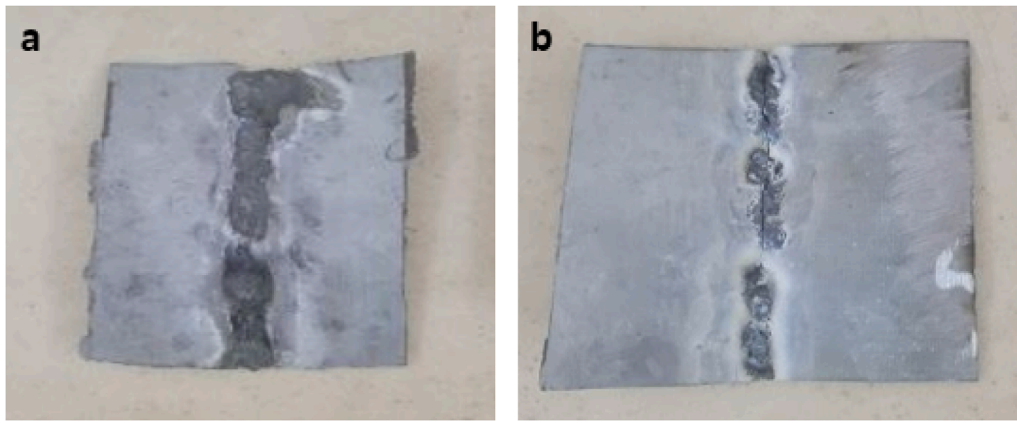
Images of welded pieces using (a) oxyacetylene gas (b) HHO gas.
